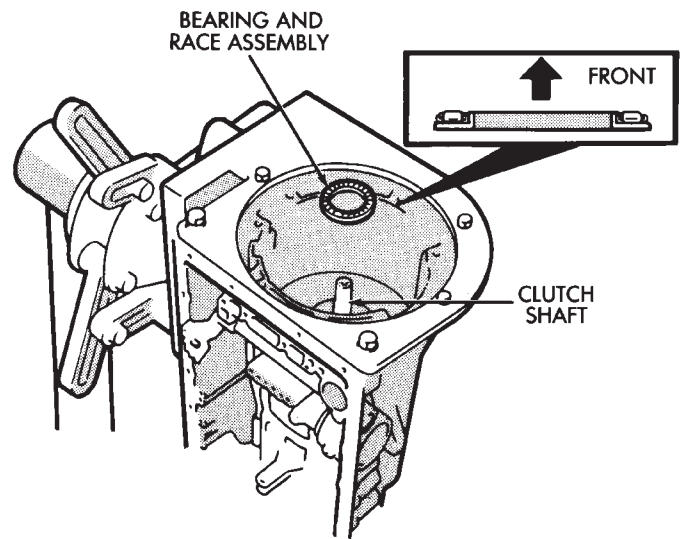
Installing Clutch Shaft Thrust Bearing And Race Assembly
